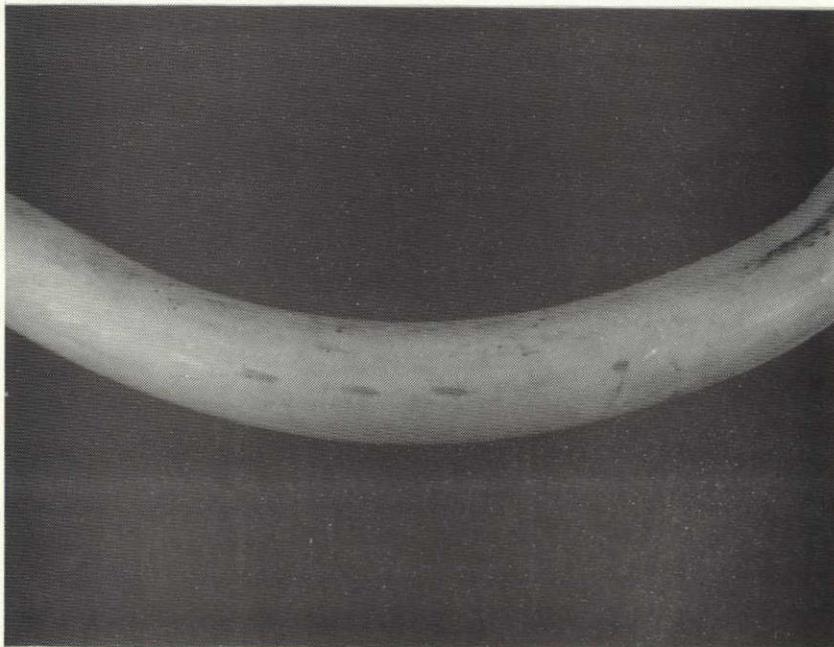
Sections of Task II Tube Flare and Bend Test Specimens Showing Maintenance of Bend Integrity. Mag. 2X
